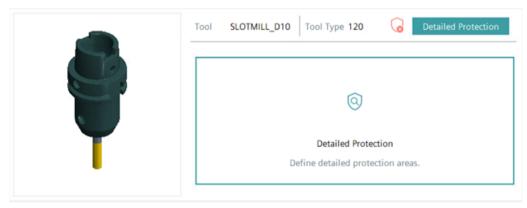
Detailed protection: Example of an end mill with imported tool holder geometry
